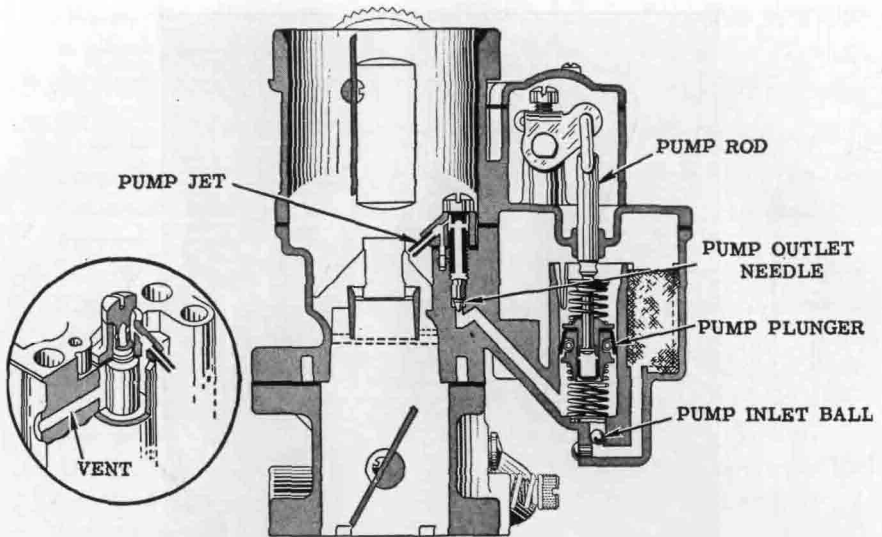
Sectional view of carburetor showing accelerator-pump system. (Oldsmobile Division of General Motors Corporation)
